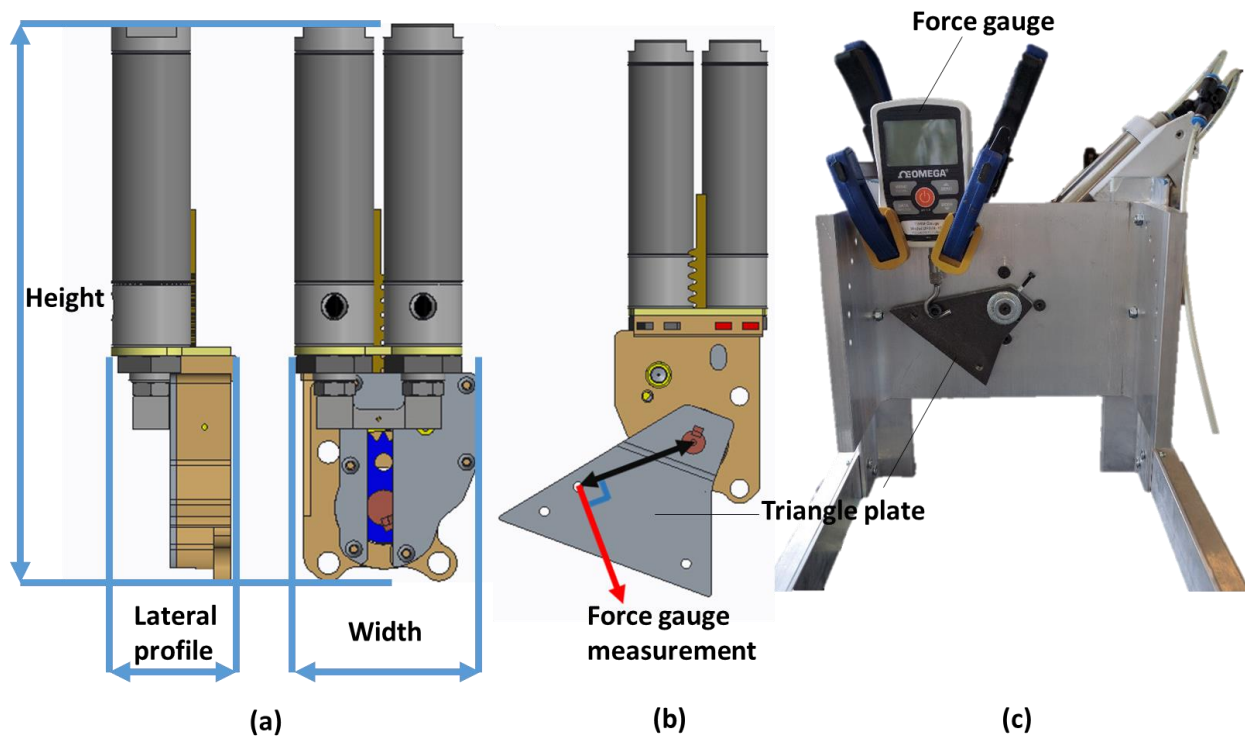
DEFINITION OF THE PHYSICAL DIMENSIONS (a) AND TORQUE MEASUREMENT SET UP (b&c)
